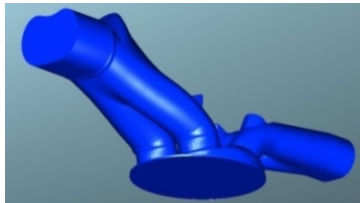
Perspective view of the combustion chamber geometry layout with 4-valves (bottom view)
